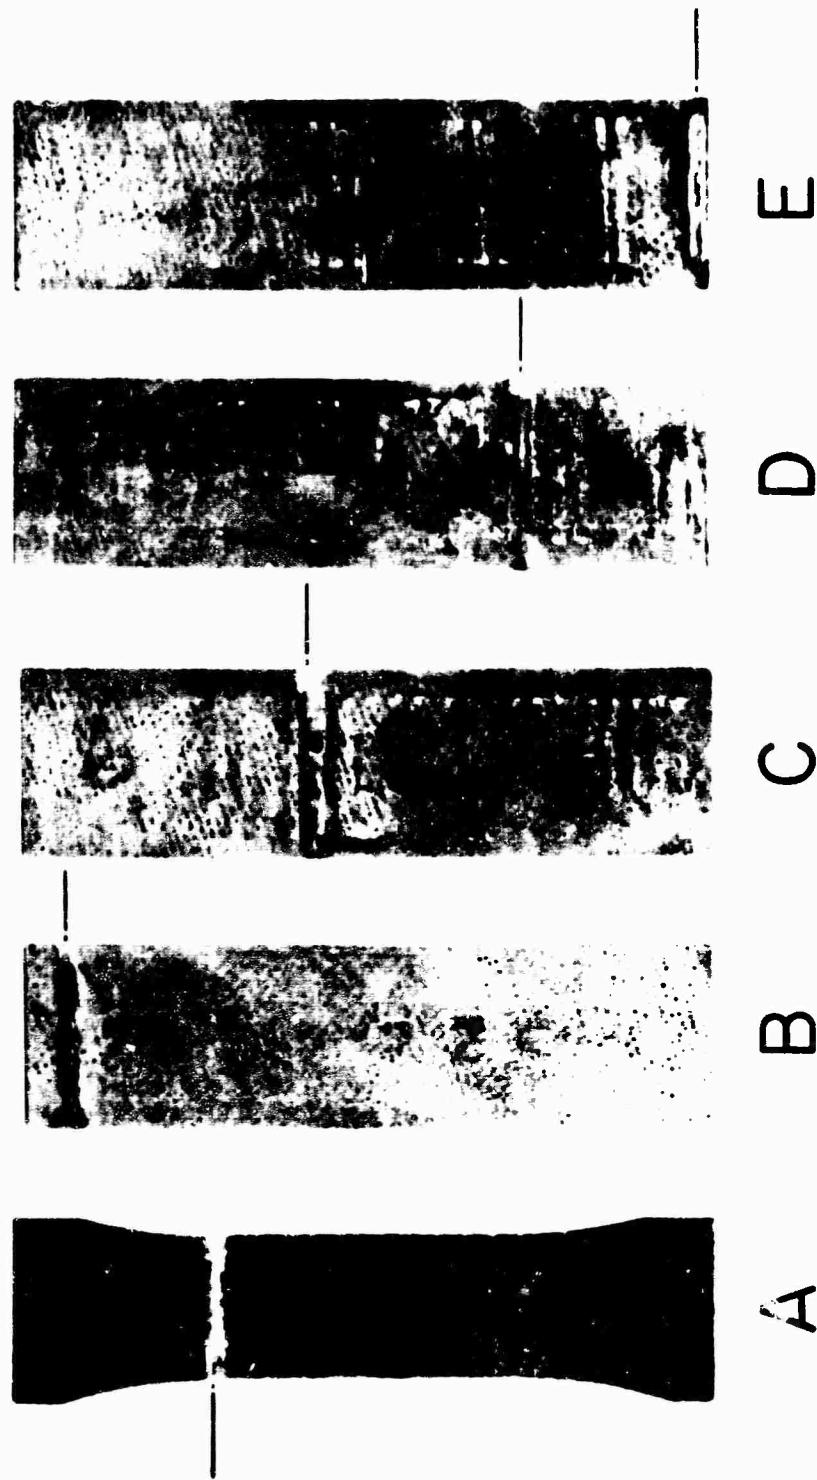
Laminate Compression Specimens. (A, Specimen Shape Initially Evaluated; B, C, D, E, Straight Sided Specimens Which Were Used Throughout Test Program Showing Various Points of Failure That Occurred Within Fixture Grips.)
